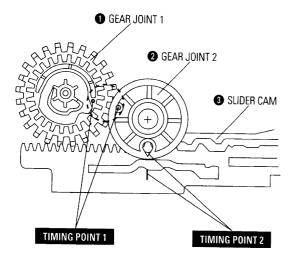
Bracket Gear, Gear FL Cam, Gear Joint 1, 2 Removal
